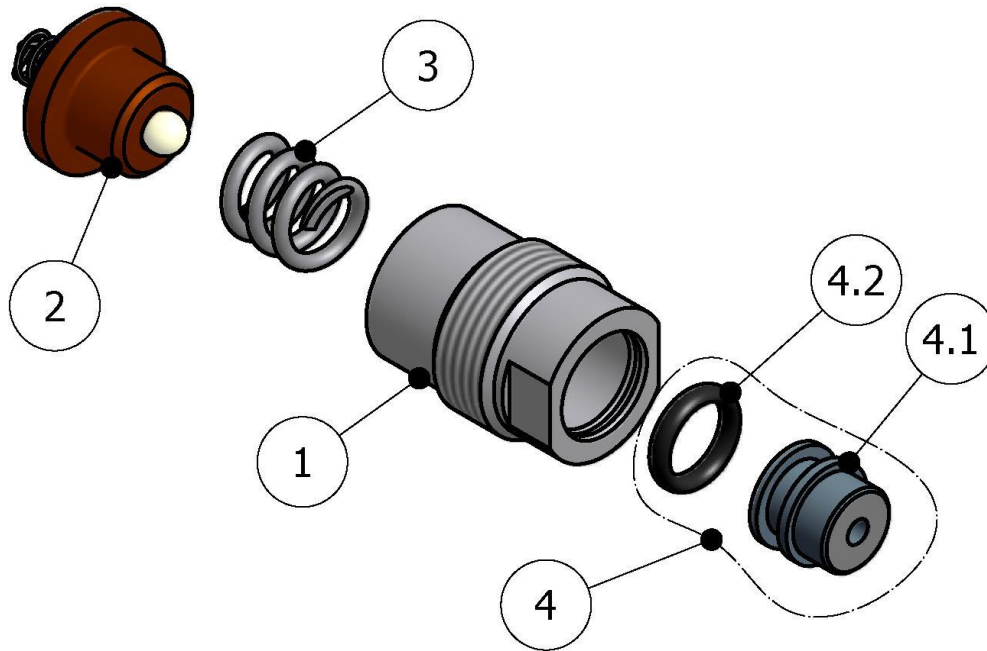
Metallic Seal Kit, Part Number GU-02031-04
